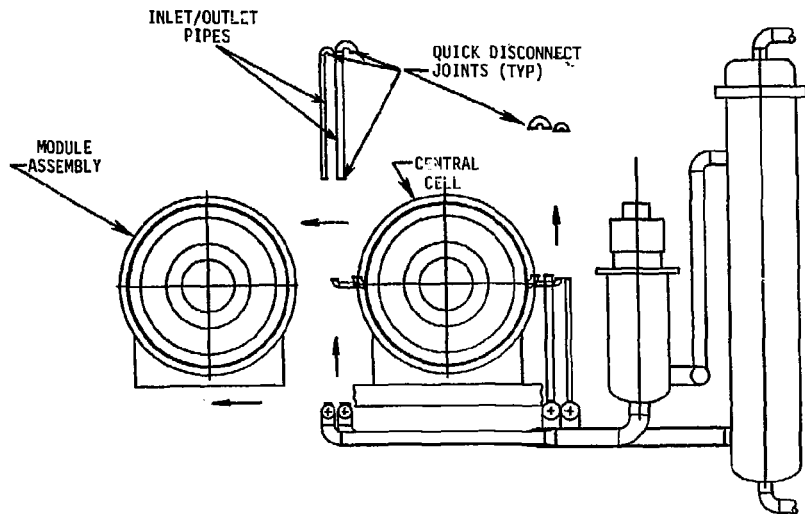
E.2. Sequence of steps for removal of blanket module assembly from the central cell.
